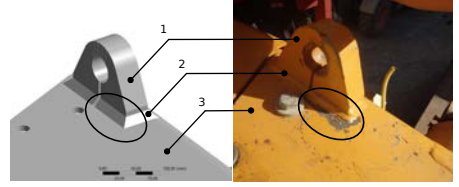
Critical area of the fillet weld at the front lifting point with eyehook (1), fillet weld (2) and upper cover plate (3) shown in Ansys (left) and on the real machine (right) [13].
